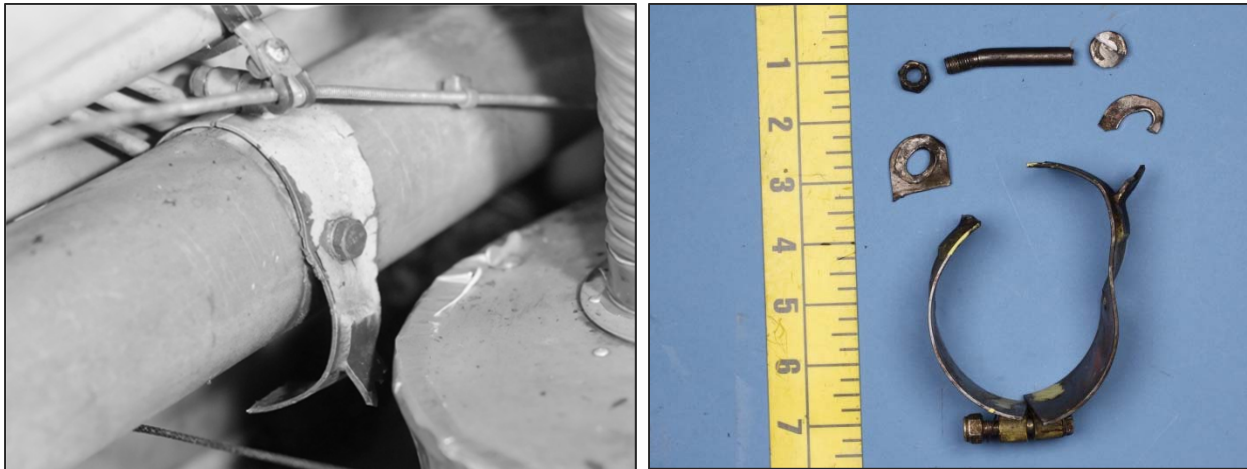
Failed clamp as-installed (left); clamp assembly and installation hardware removed (right).
